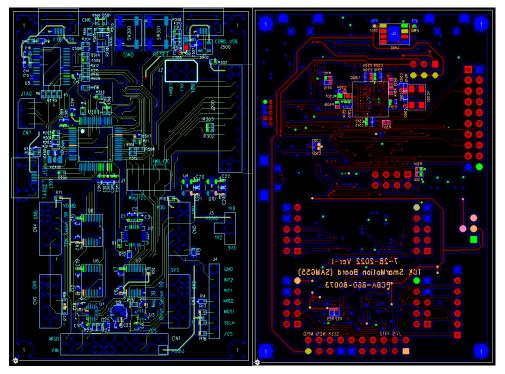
Ver. I PCB Top view (left) and Bottom view (right)
